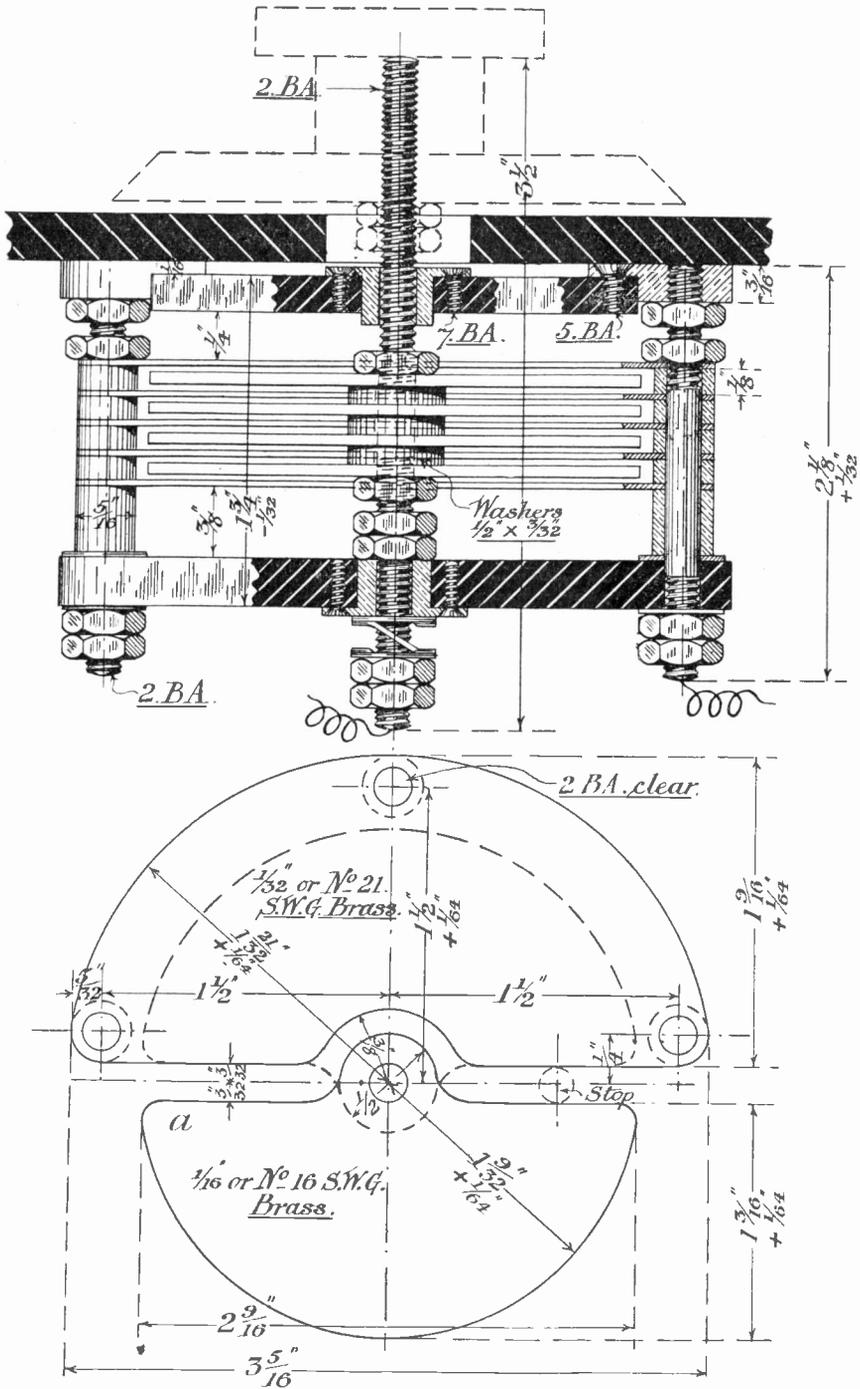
Sectional Elevation of Condenser and Plan of Plates.
